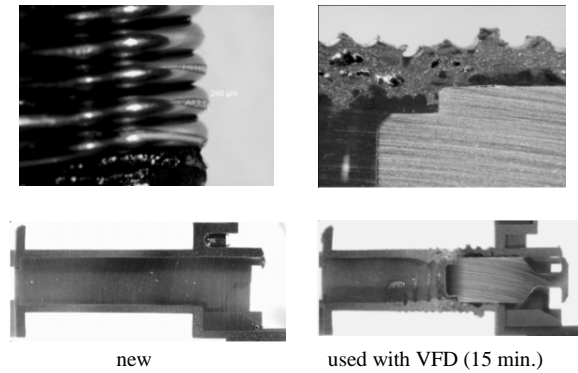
Damaged coil wire insulation and molten coil former with mechanically blocked Armature (Product C).
